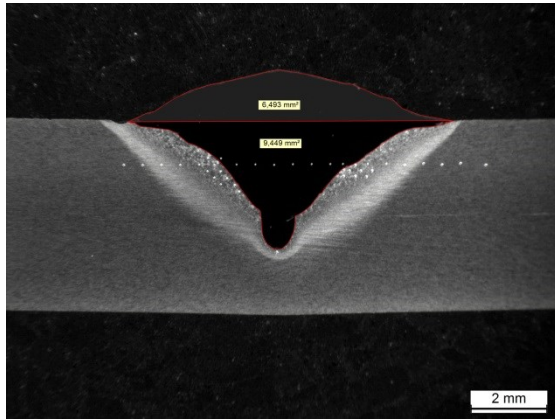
LAHW welded sample 3.5.2-3.
